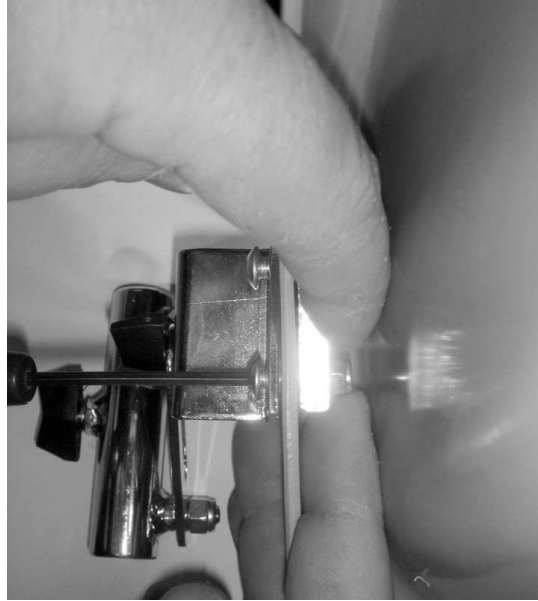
Secure mounting block and fixing screw using the nylock nuts
